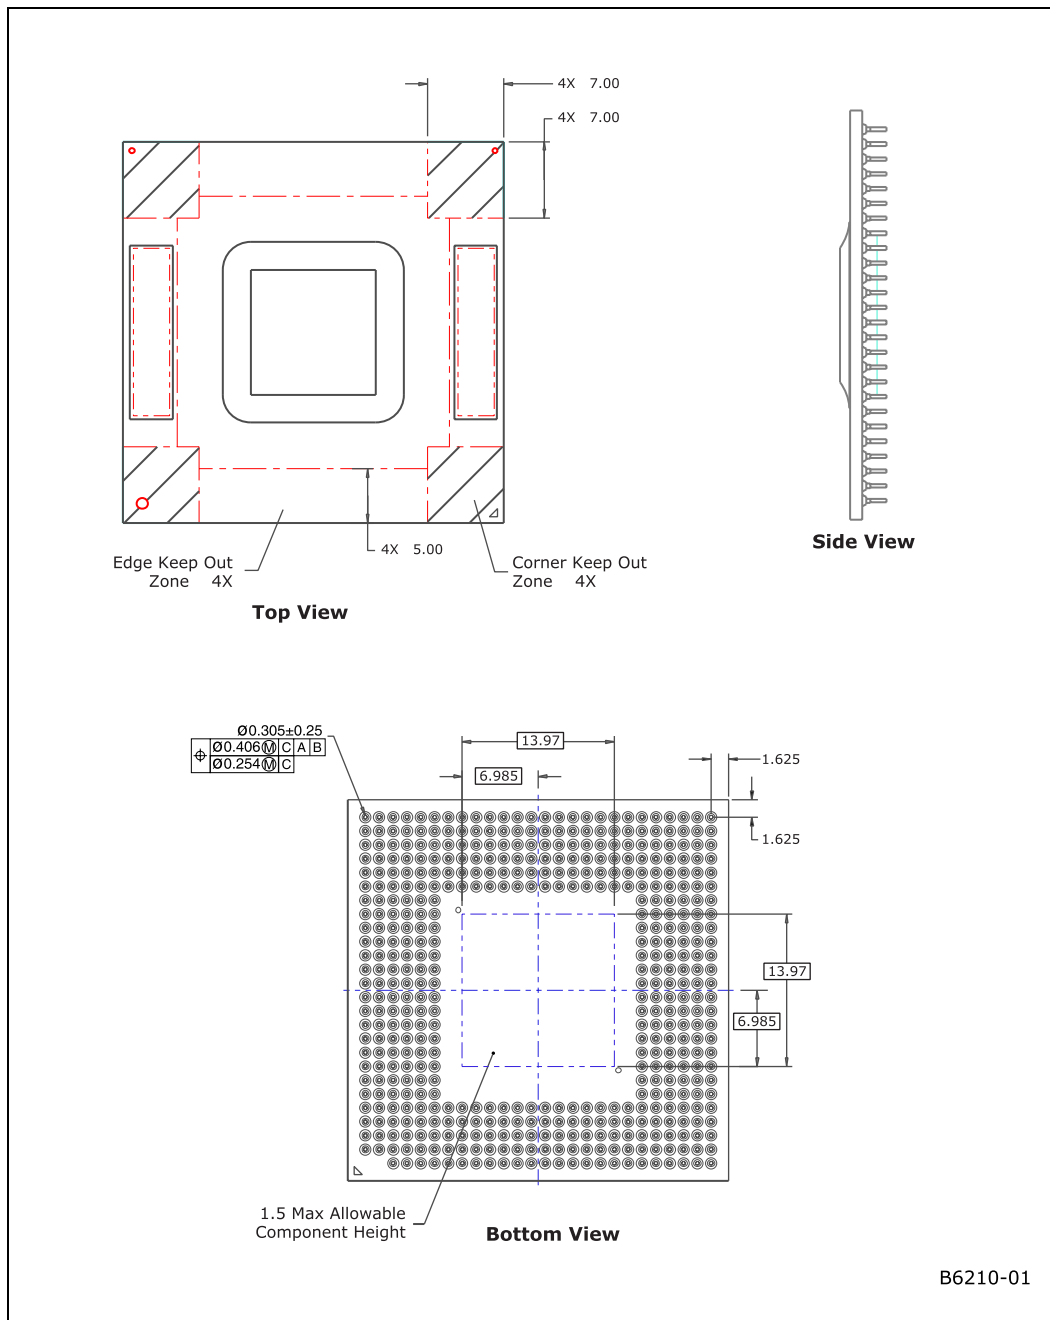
1-MB Fused Micro-FCPGA Processor Package Drawing (2 of 2)
